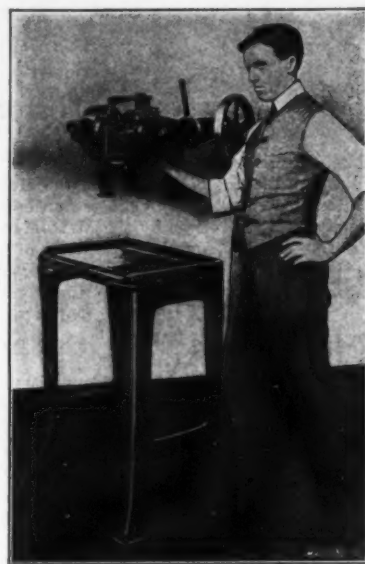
Paper clip machine which turns out finished clips at the rate of 450 per minute.
